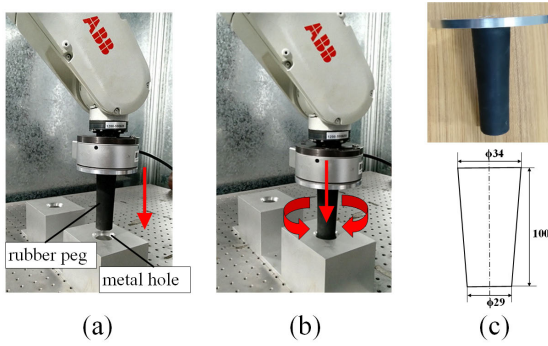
Setup for interference-fit peg-in-hole assembly: (a) linear insertion, (b) screw insertion, (c) rubber taper workpiece peg.
